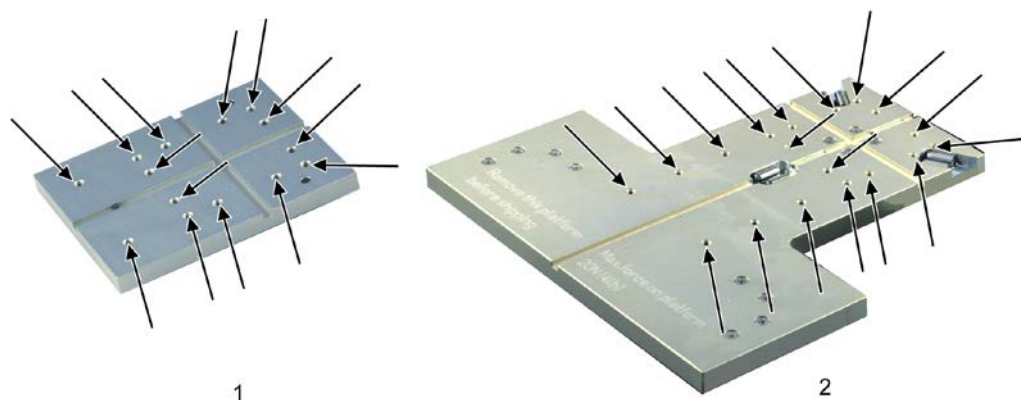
M3 mounting holes with 6 mm depth for fixing the load
